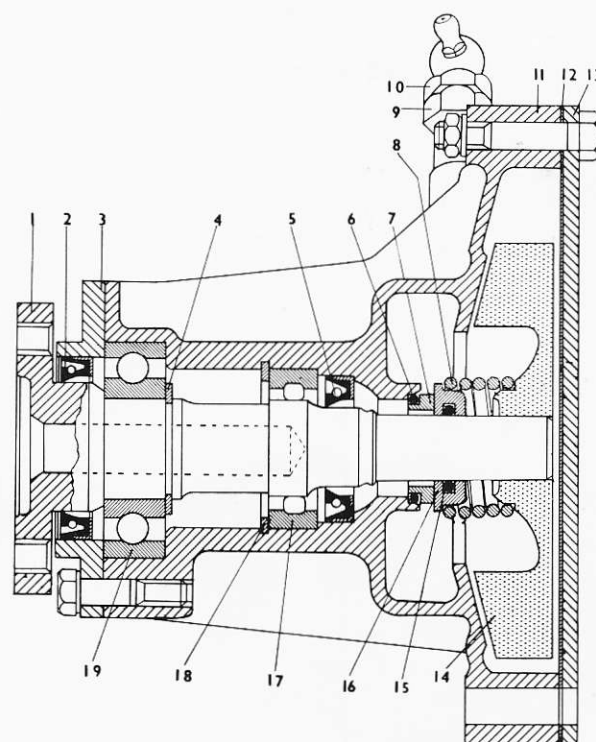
Sectional view S1 cars — coolant pump with refrigeration
